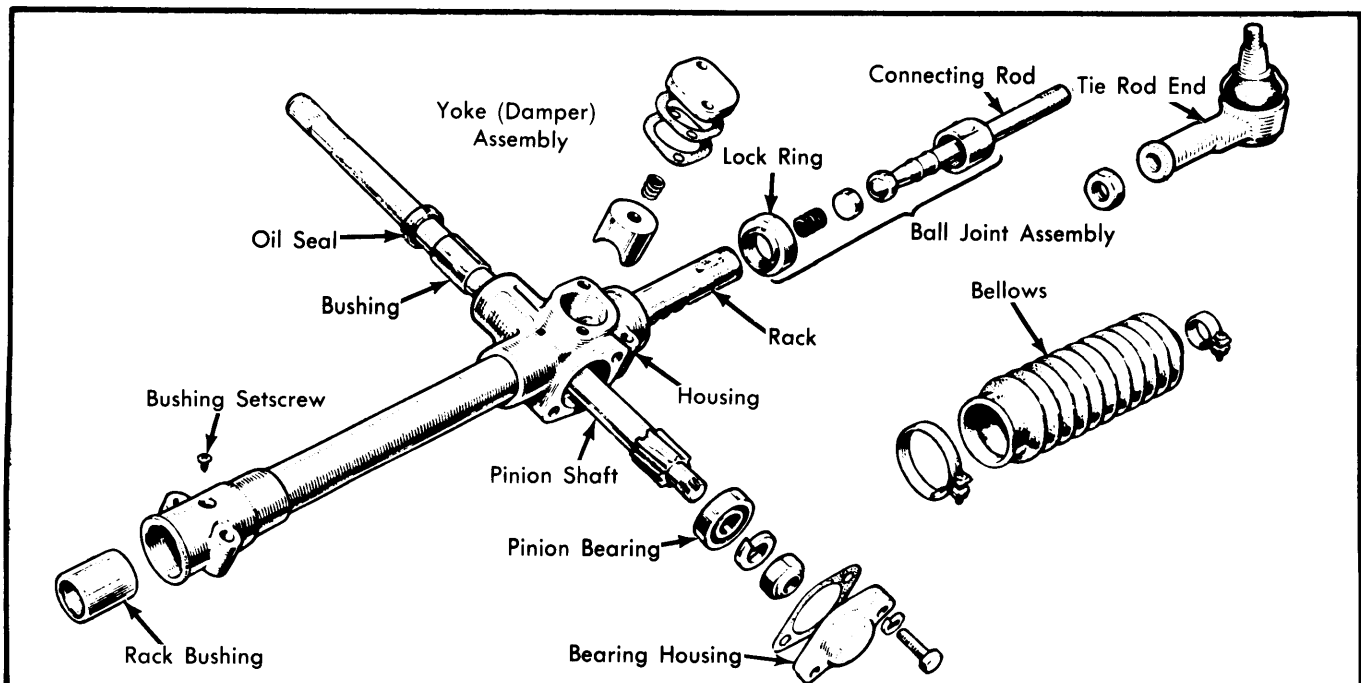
Exploded View of MGB Rack and Pinion Assembly
